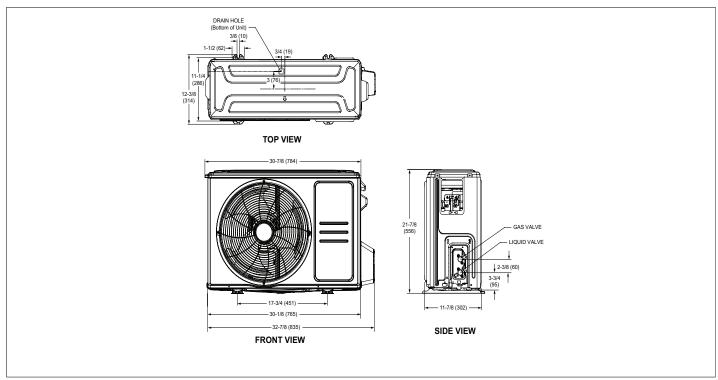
208/230V - MPC009S4S and MPC012S4S Outdoor Unit Dimensions - Inches (mm)
